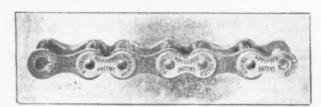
Double Bushed Patent Twin Roller Chain.
